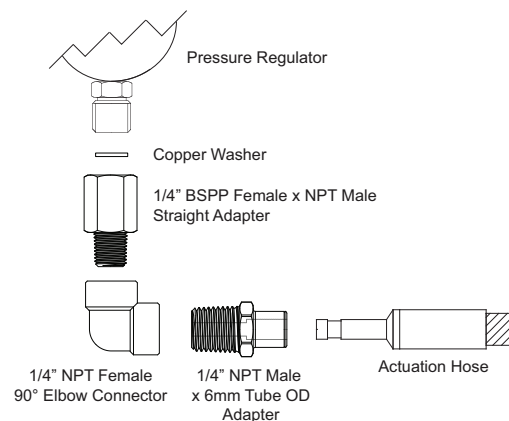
Pressure Regulator Outlet Adapters and Hose
